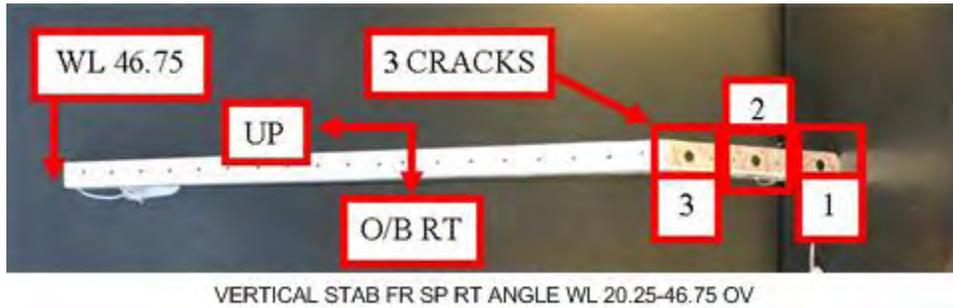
Location of Three Cracks on the Vertical Stabilizer Front Spar Right Angle WL 20.25 Through WL 46.75
